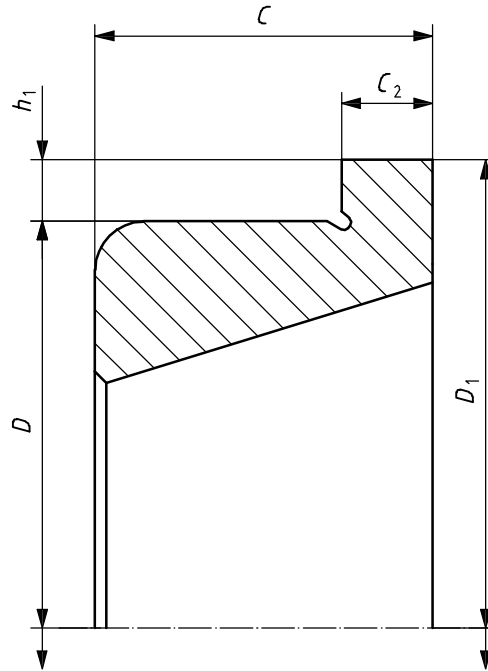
Single-row tapered roller bearing with flanged outer ring
